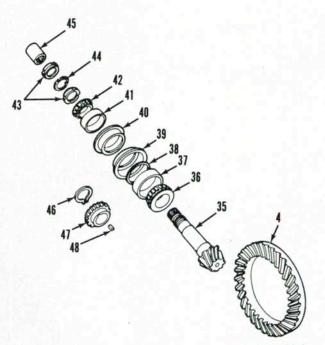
Exploded view of bevel pinion assembly. Pinion bearing cups (37 and 41) are supported in sleeves (39 and 40) which fit in bores of rear axle center housing. Bearing preload is adjusted by nuts (43).
